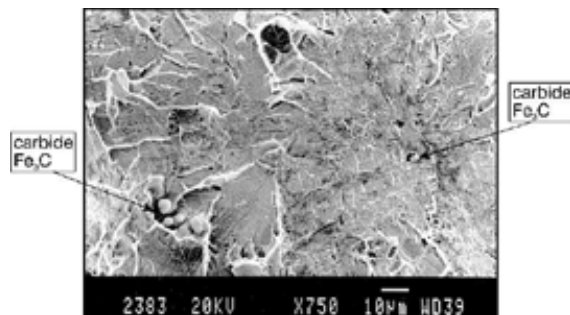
Identification of brittle fracture initiation point as Fe_3C on the fracture surface of CTOD test sample
